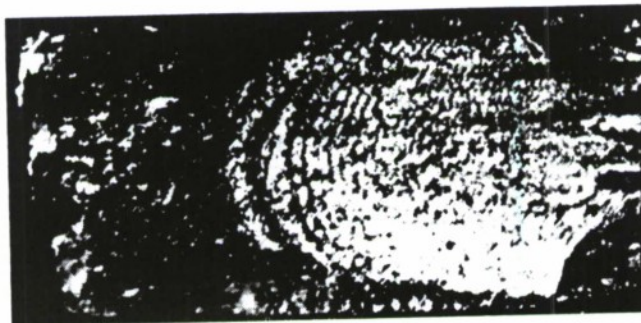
A-7A Wing Fatigue Test Fracture Surface (Reference 27).
